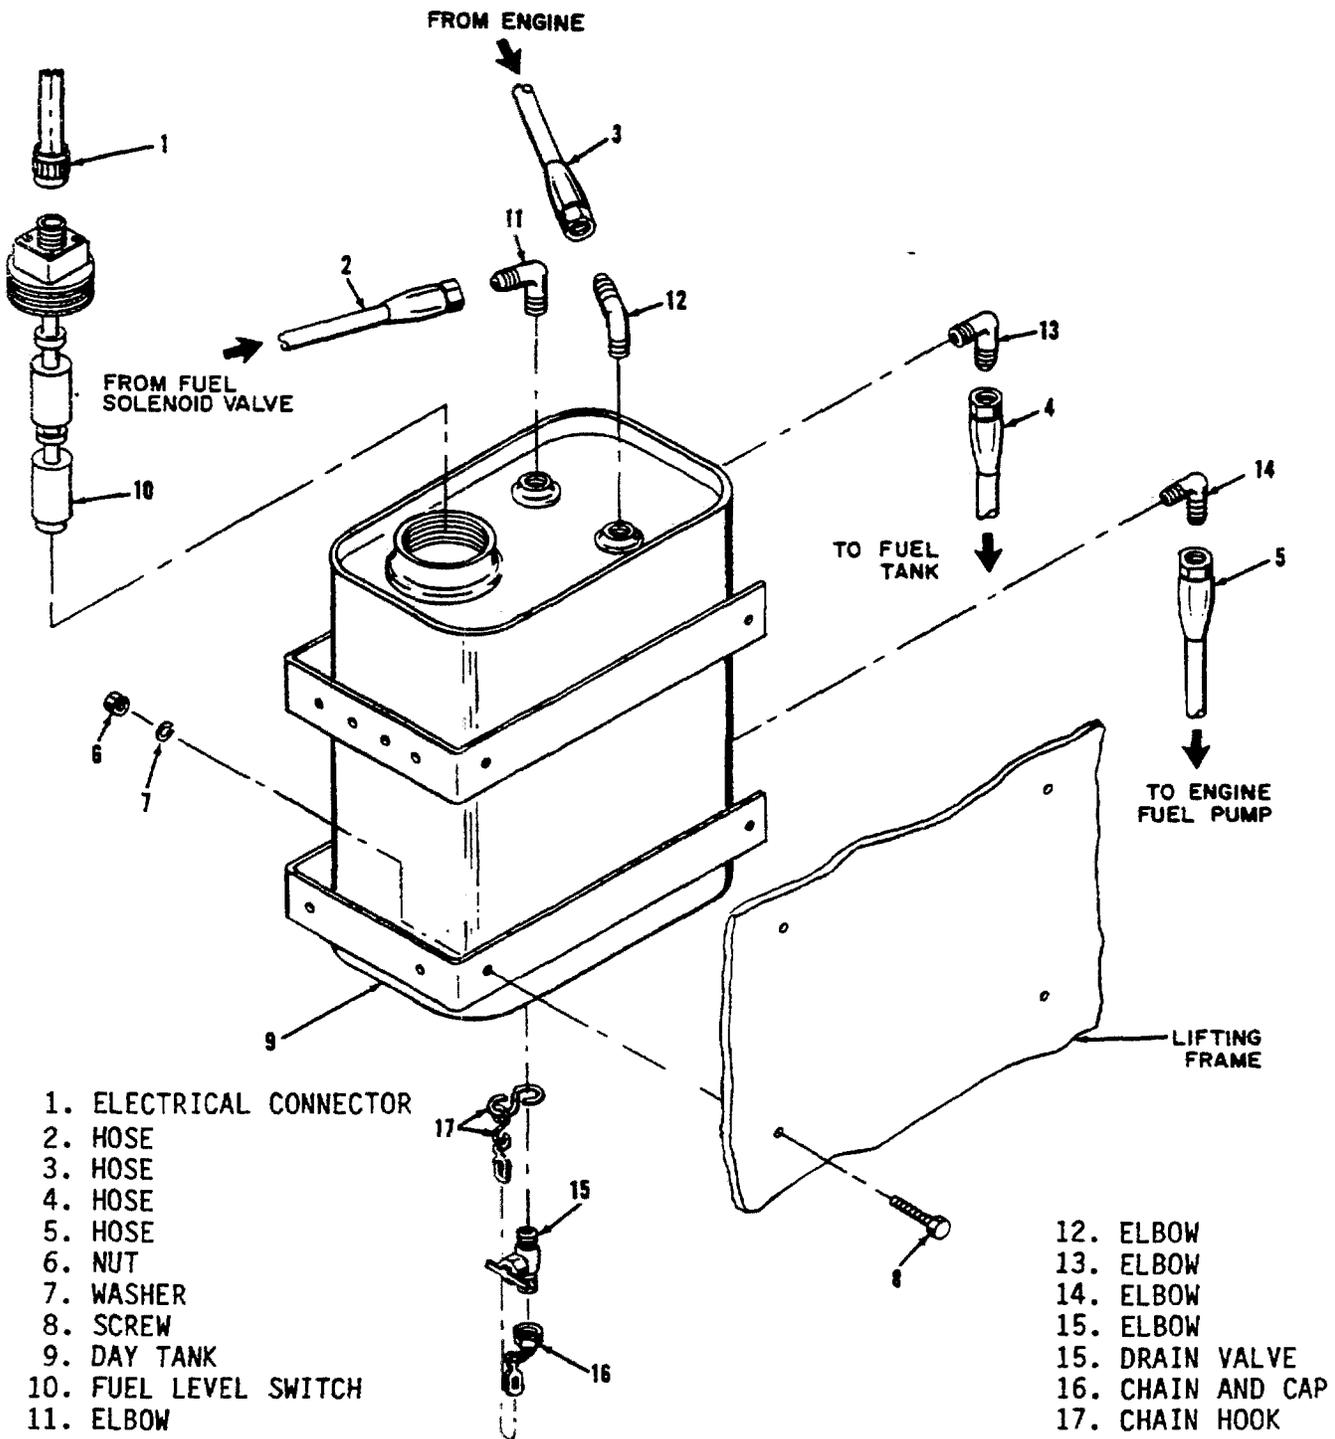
Fuel Level Switch and Day Tank, Exploded View
